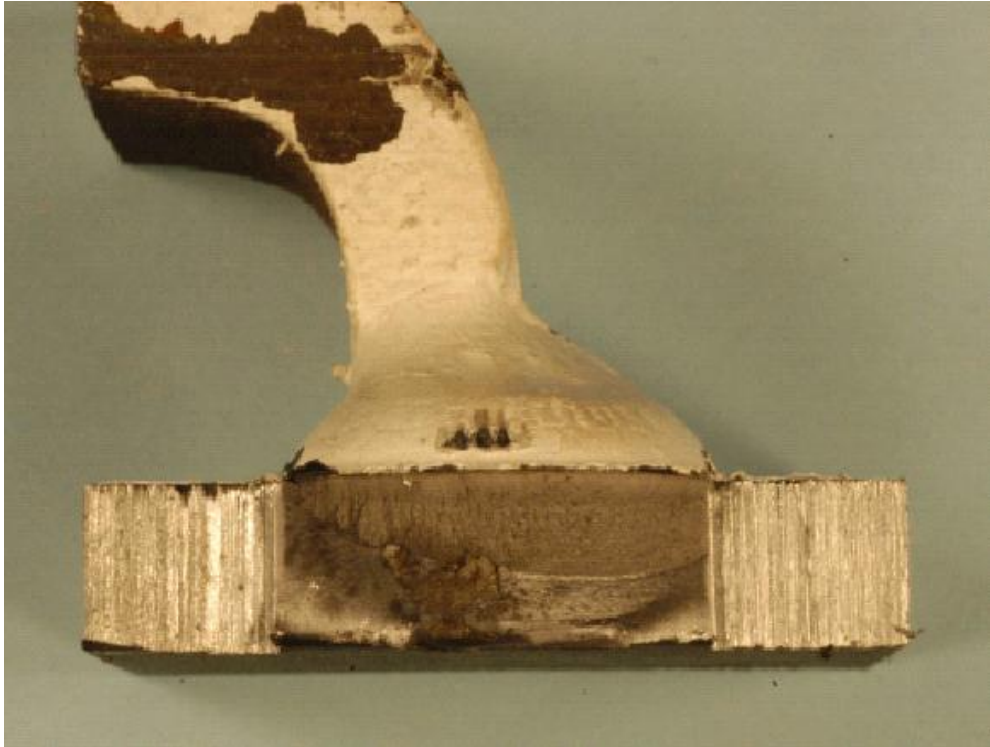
Typical fatigue cracks at the end life of the structure
